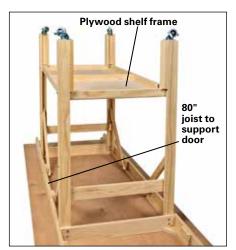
End view of leg assembly. Another look at the underside shows that the door is glued and screwed into place.
